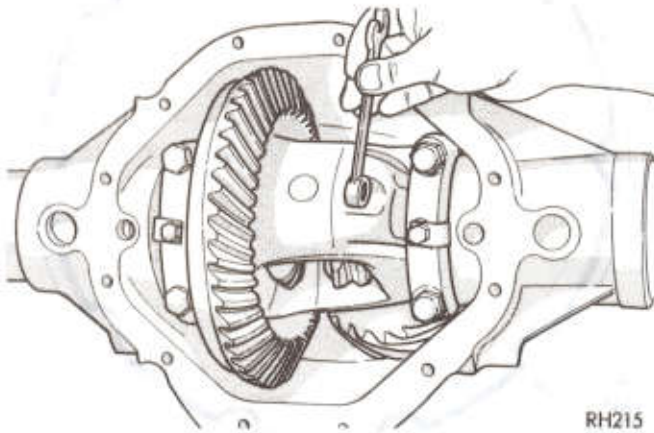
Removal or Installation of Differential Pinion Shaft Lock Pin
